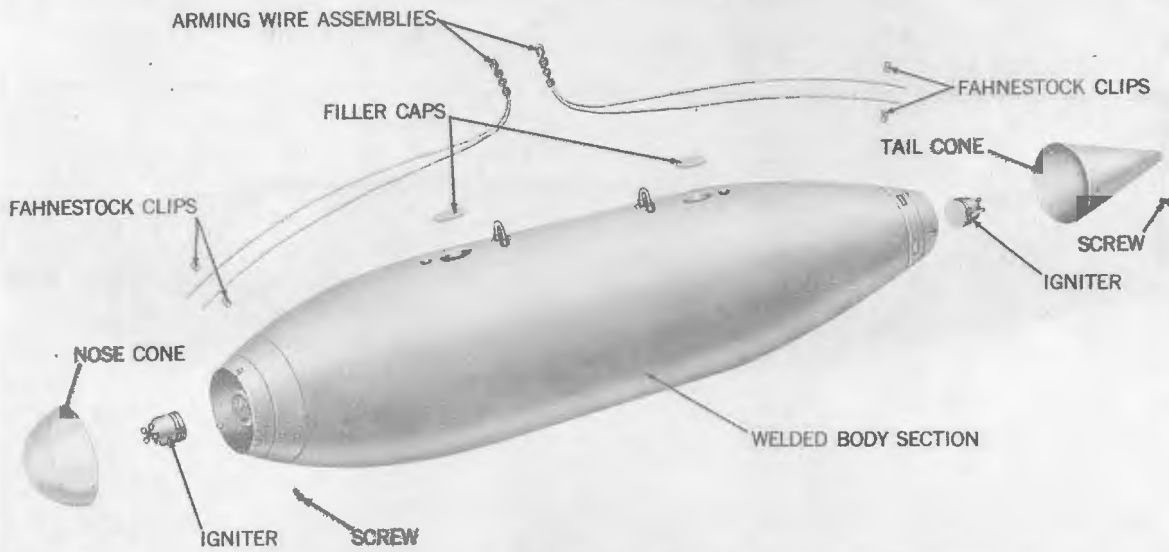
500-lb Fire Bomb Mk 77 Mod 1, Exploded View.
